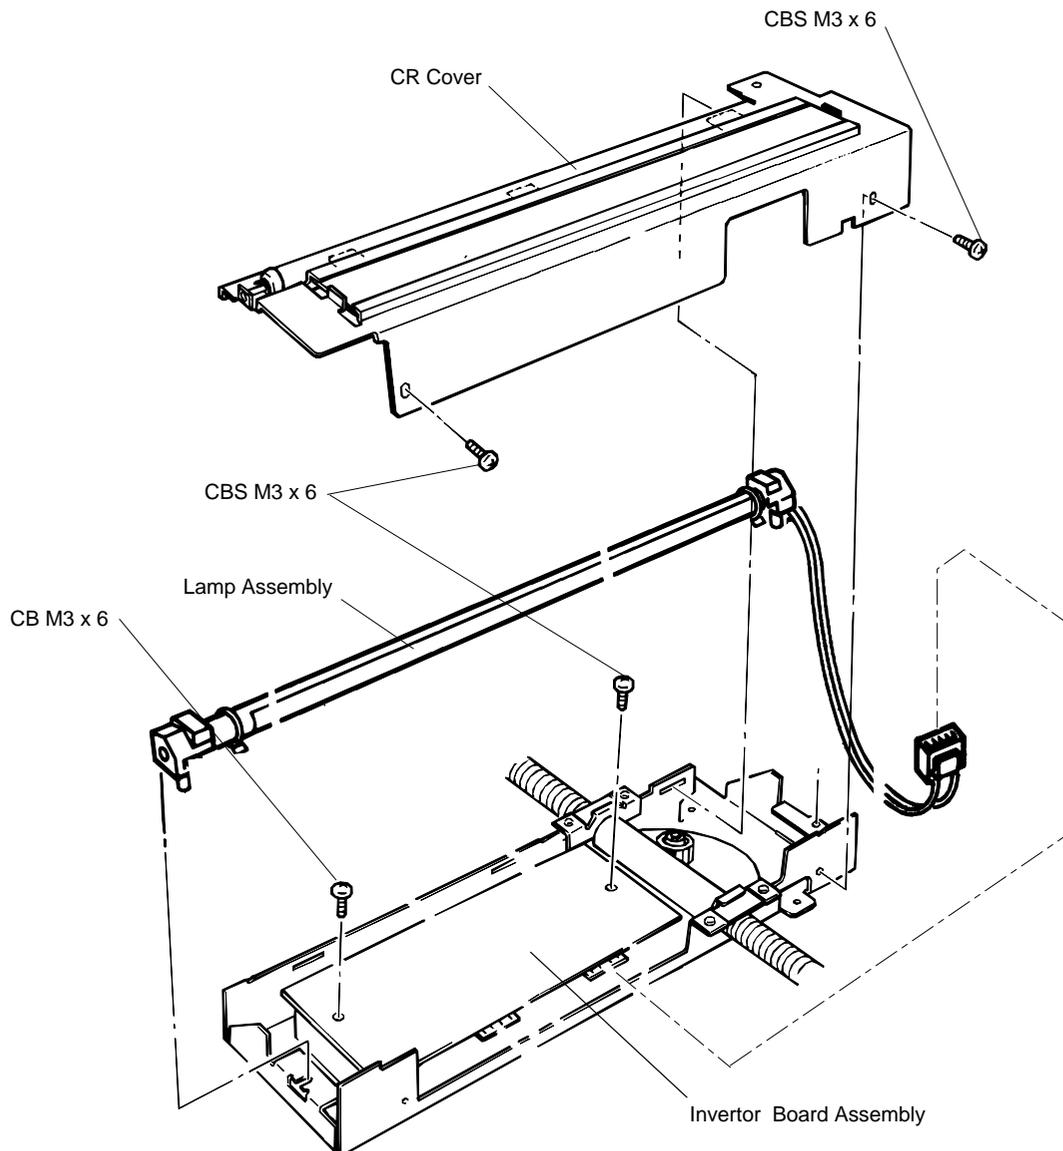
Removing the Lamp Assembly of Transparency Unit
